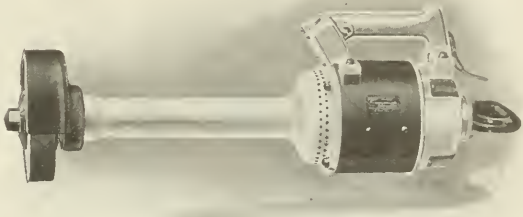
Hisey-Wolf Portable Electric Grinder with Long Spindle and Guarded Wheel
